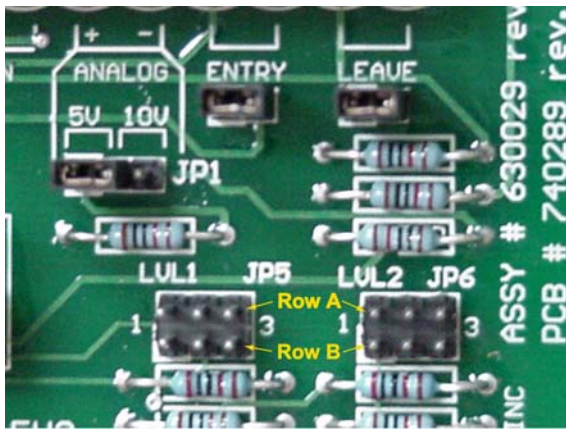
Compressor Interface Jumper Locations (1 of 2)
